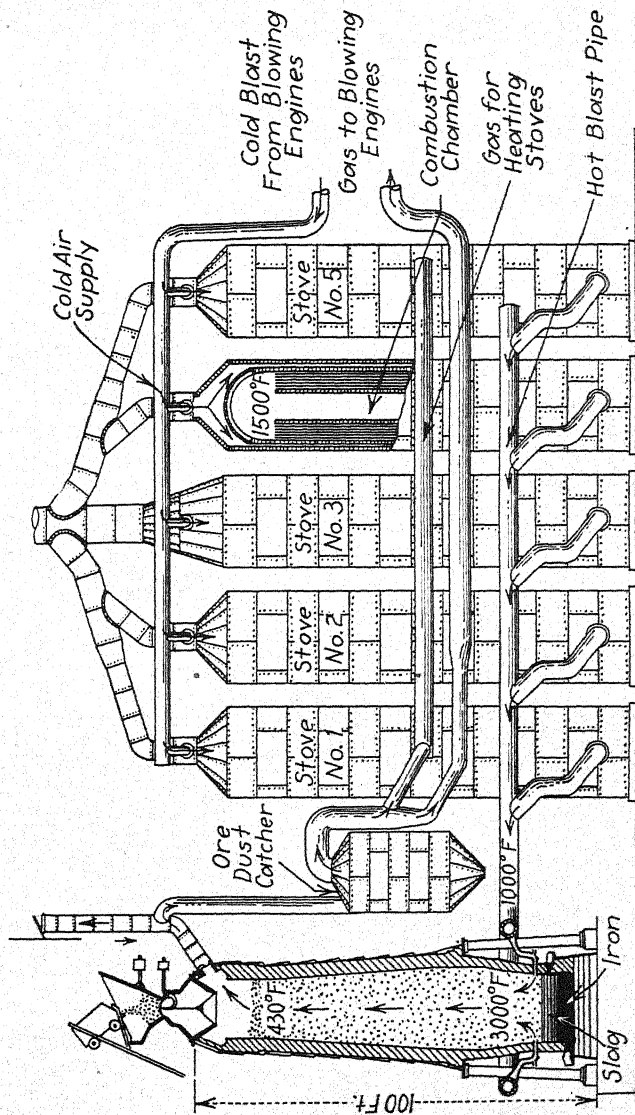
Blast-furnace unit with five stoves. (Courtesy of Minnesota Steel Company.)
